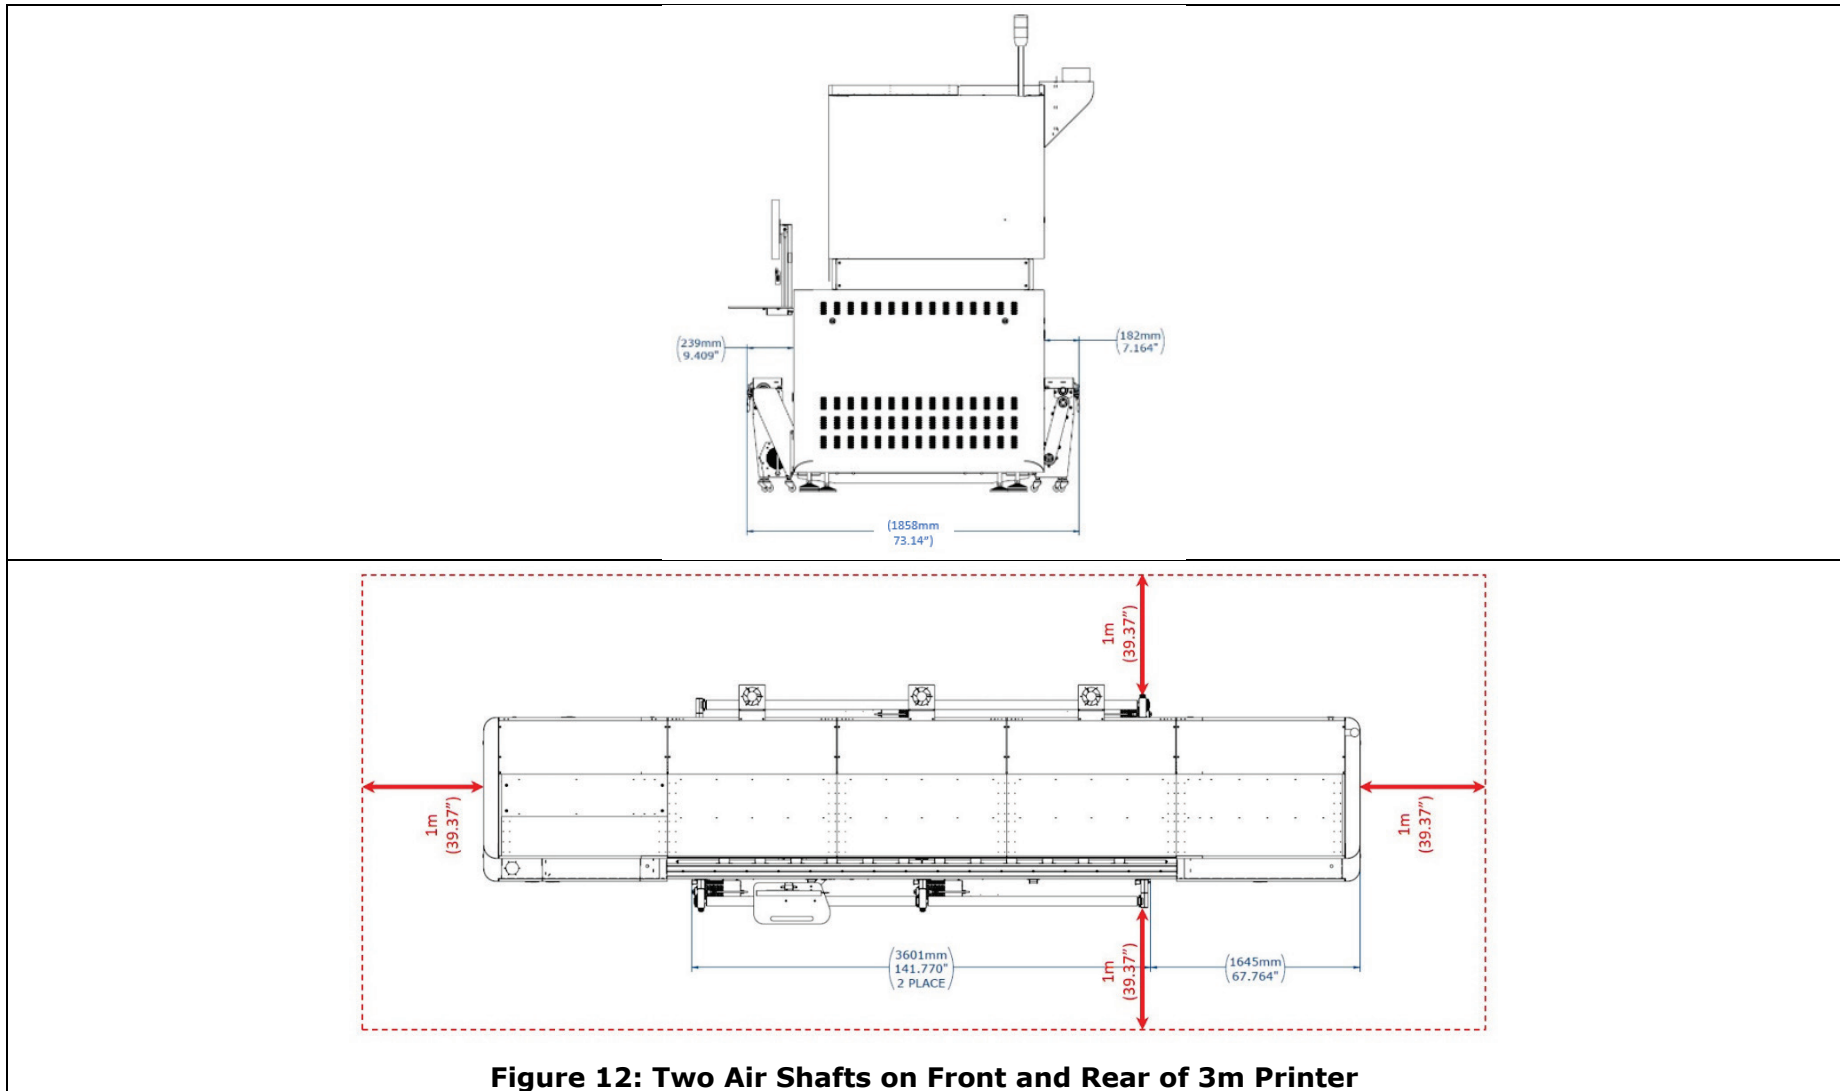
Two Air Shafts on Front and Rear of 3m Printer
